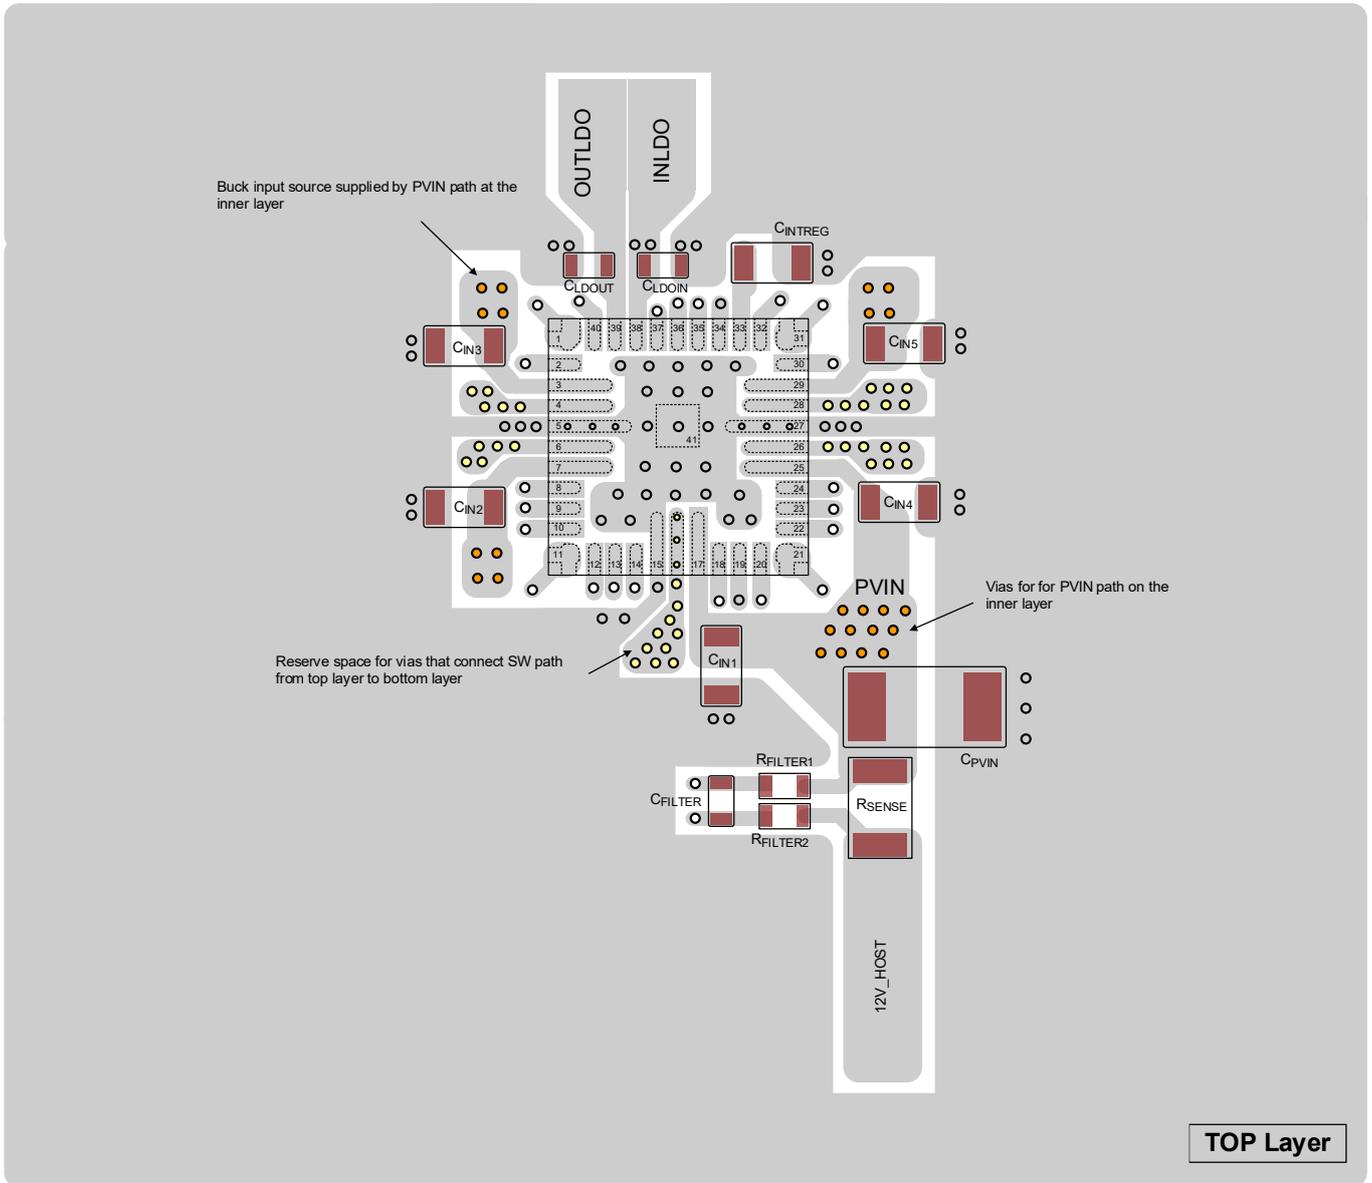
PCB Layout Reference of Option 2 (Top Layer)
